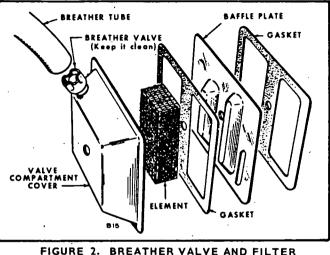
BREATHER VALVE AND FILTER MAINTENANCE
